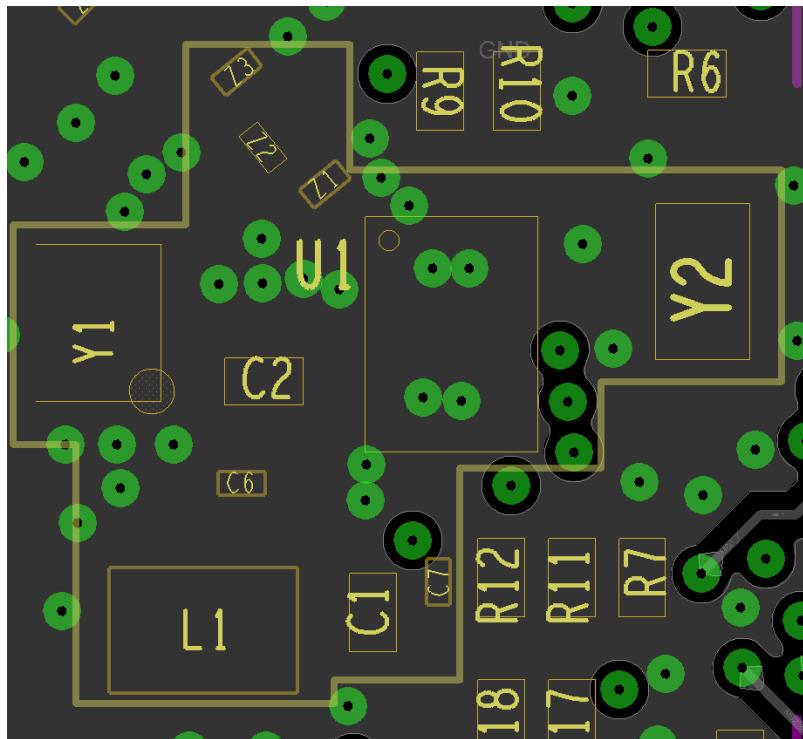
FCGQFN24 PCB Placement and Routing – GND Bottom Layer
